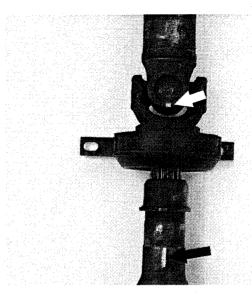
Before pulling apart driveshaft sections, make matching marks as shown.
